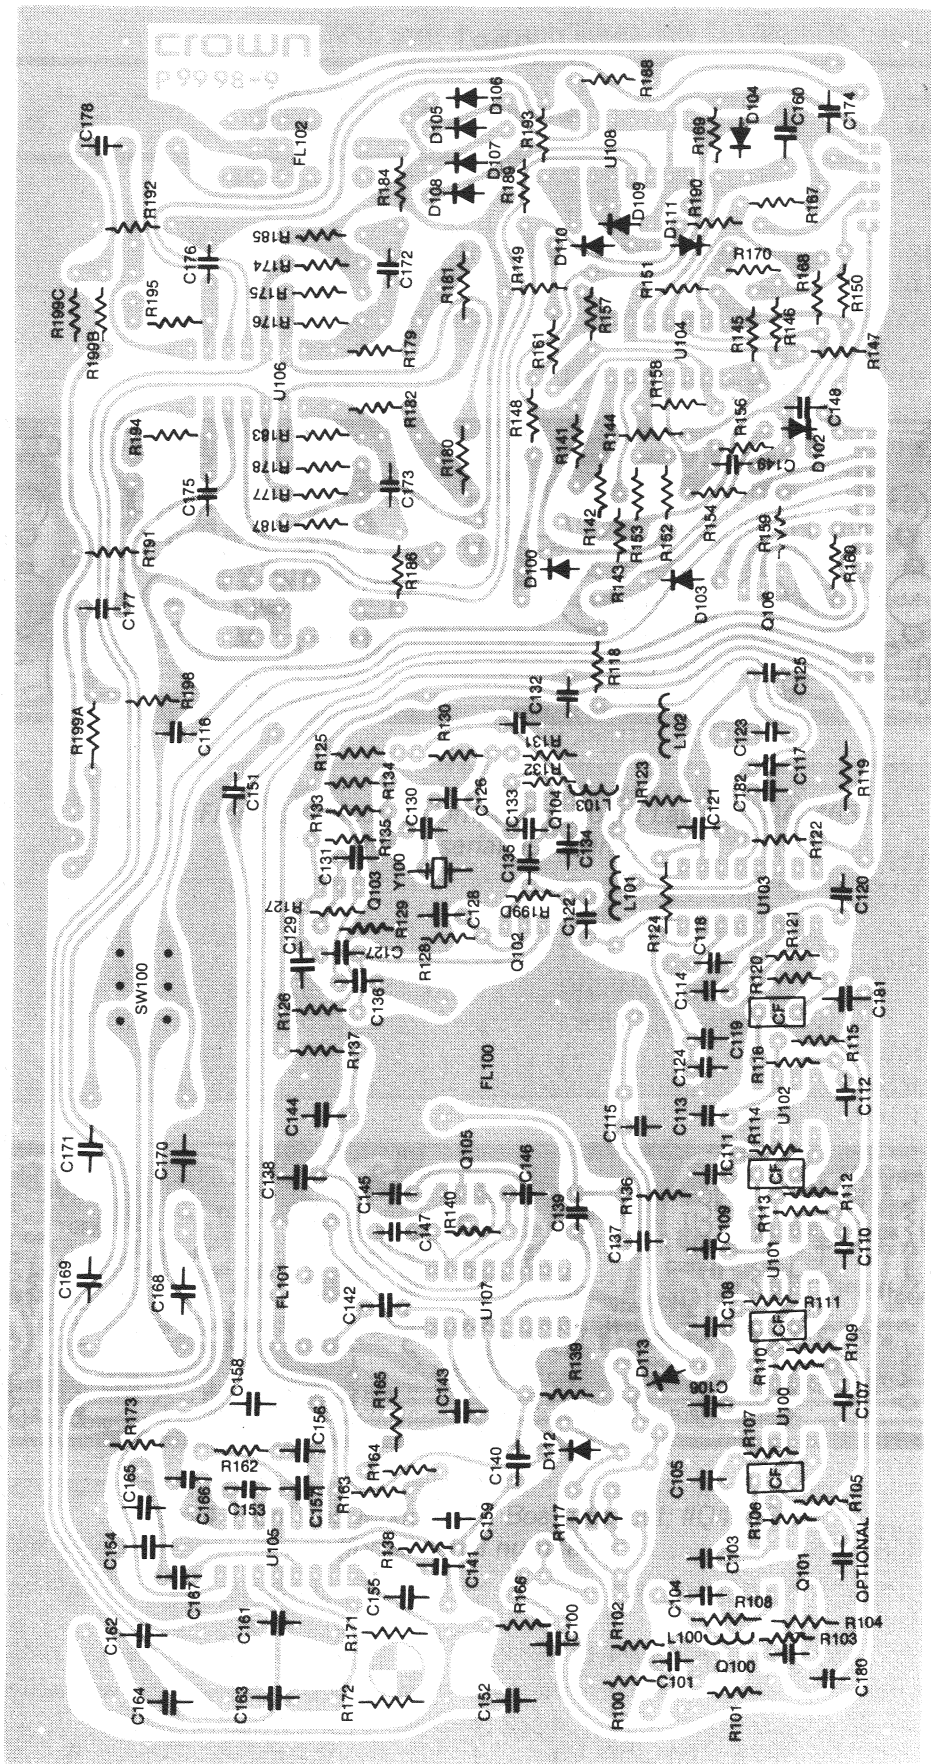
Main Module Foil Board Layout; #Q42467J2
